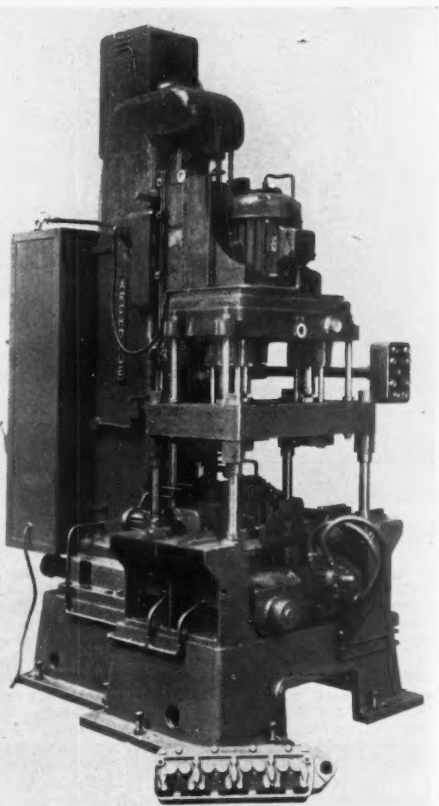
Archdale machine with a special shuttling fixture for drilling, reaming and spot facing location points on the cylinder head
